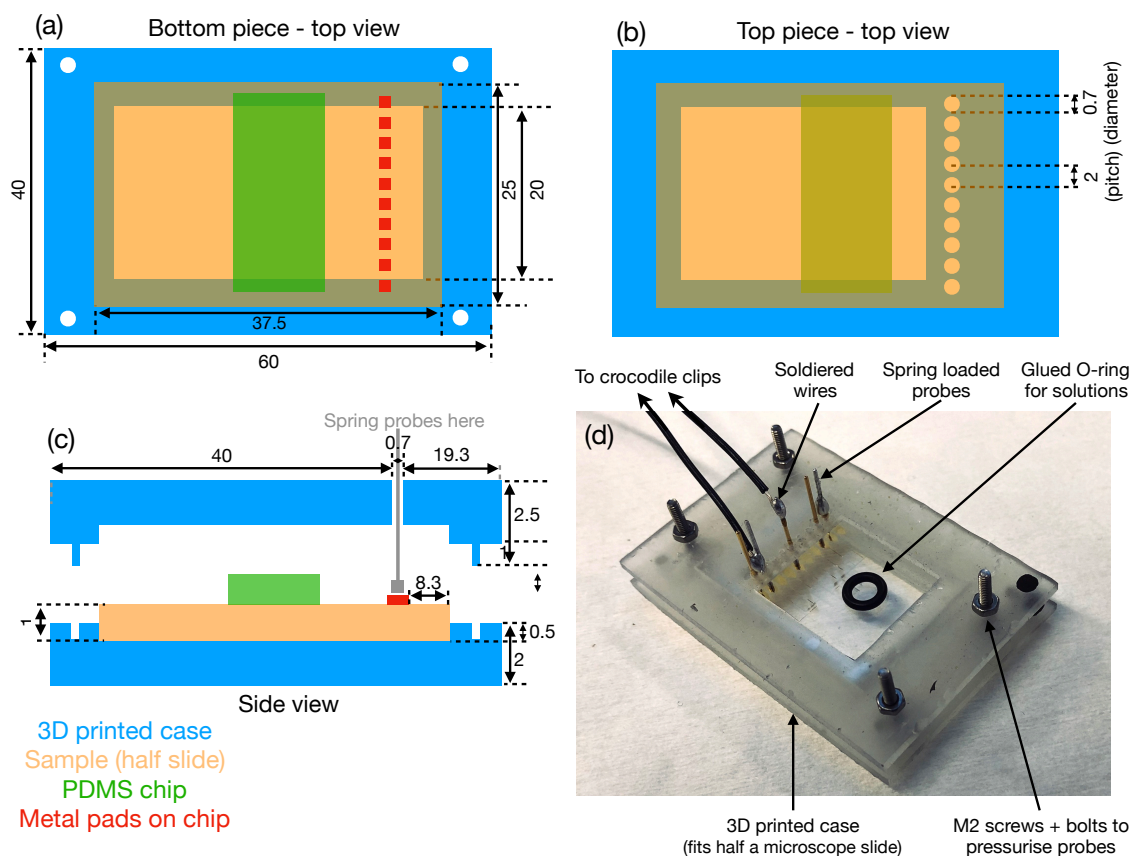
Schematics of the 3D printed units for housing the samples and performing electrical measurements. (a, b) Top view diagram of the bottom and top pieces of the 3D printed case. The lateral dimensions are designed to fit half a microscope slide. The top piece contains holes to match the metal pads of the sample for inserting and holding the spring-loaded probes. An opening is included in the middle to house the PDMS chip and to allow observation under a microscope. (c) Side view of the case showing how the two pieces pressurise the spring probes to ensure electrical contact. All dimensions are reported in mm. (d) Picture of the printed case including standard M2 screws and bolts to clamp the sample and pressurise the probes onto the pads. A 3mm O-ring was glued onto the measurement area to hold solutions and allow measurement when a microfluidic channel is not needed. Wires are soldered to the top end of the probes to provide connection through standard crocodile clips (not shown here).
